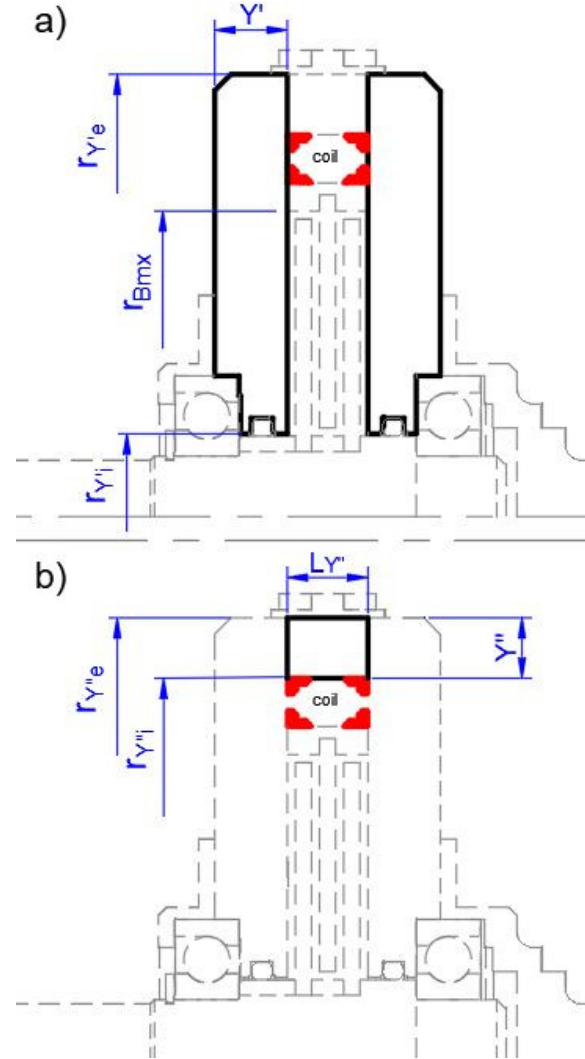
Cover and cylindrical yoke for clutch. a) Cover yoke dimensions. b) Cylindrical yoke dimensions
